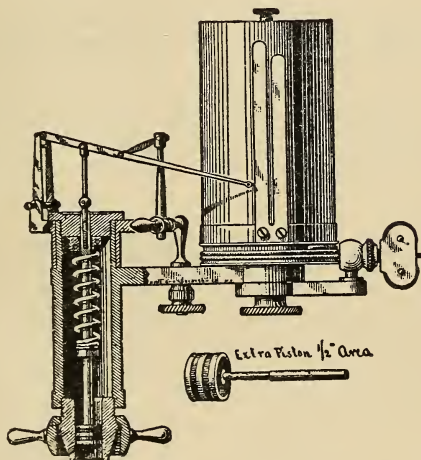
The indicator. It consists of a small cylinder communicating by a cock with the cylinder of the engine, and fitted with a piston, to which a pencil is attached. The roller upon which a card is fastened, is oscillated forward and backward by a cord attached to the piston rod of the engine as the pencil rises by the steam pressure, and is brought back by a graduated spring when that pressure is reduced. This traces a closed figure upon the card, which represents the pressure at each point in the stroke of the engine.
